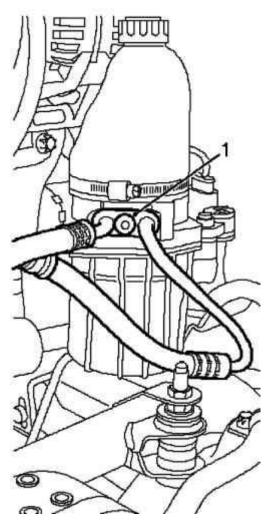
Bolt mounting fuel line: 1 - Bolt
